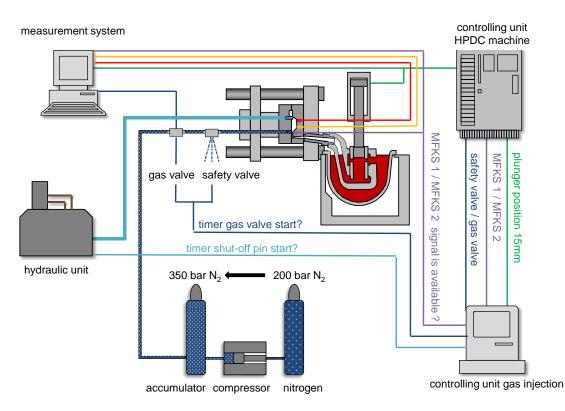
Diagram to show the control-related linking of die casting machine and gas injection unit
